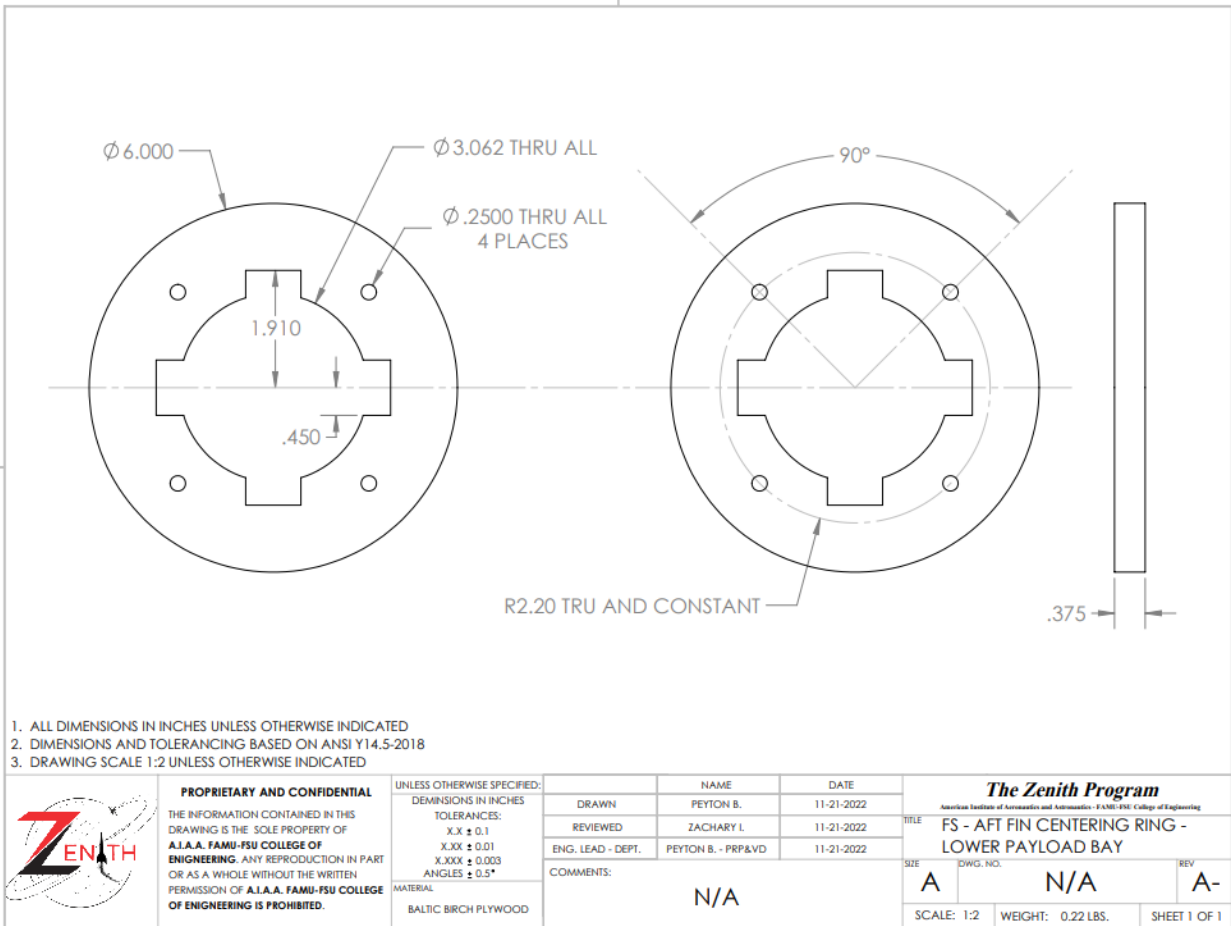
Aft Fin Centering Ring CAD Drawing
